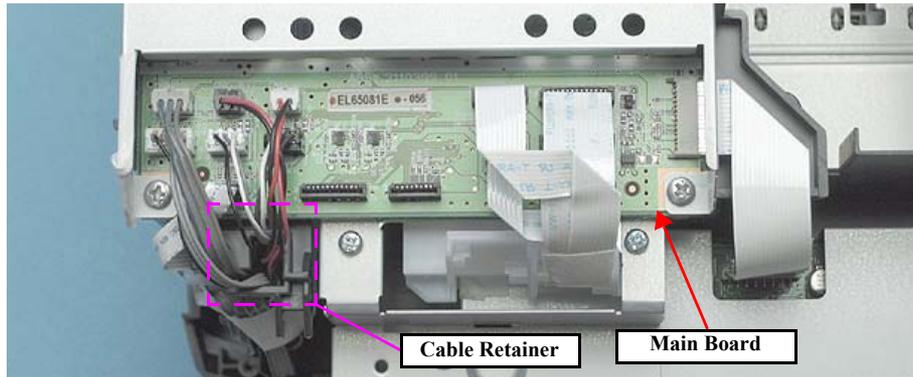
Removing the Cables (R360/R380/R390 Main Board)
